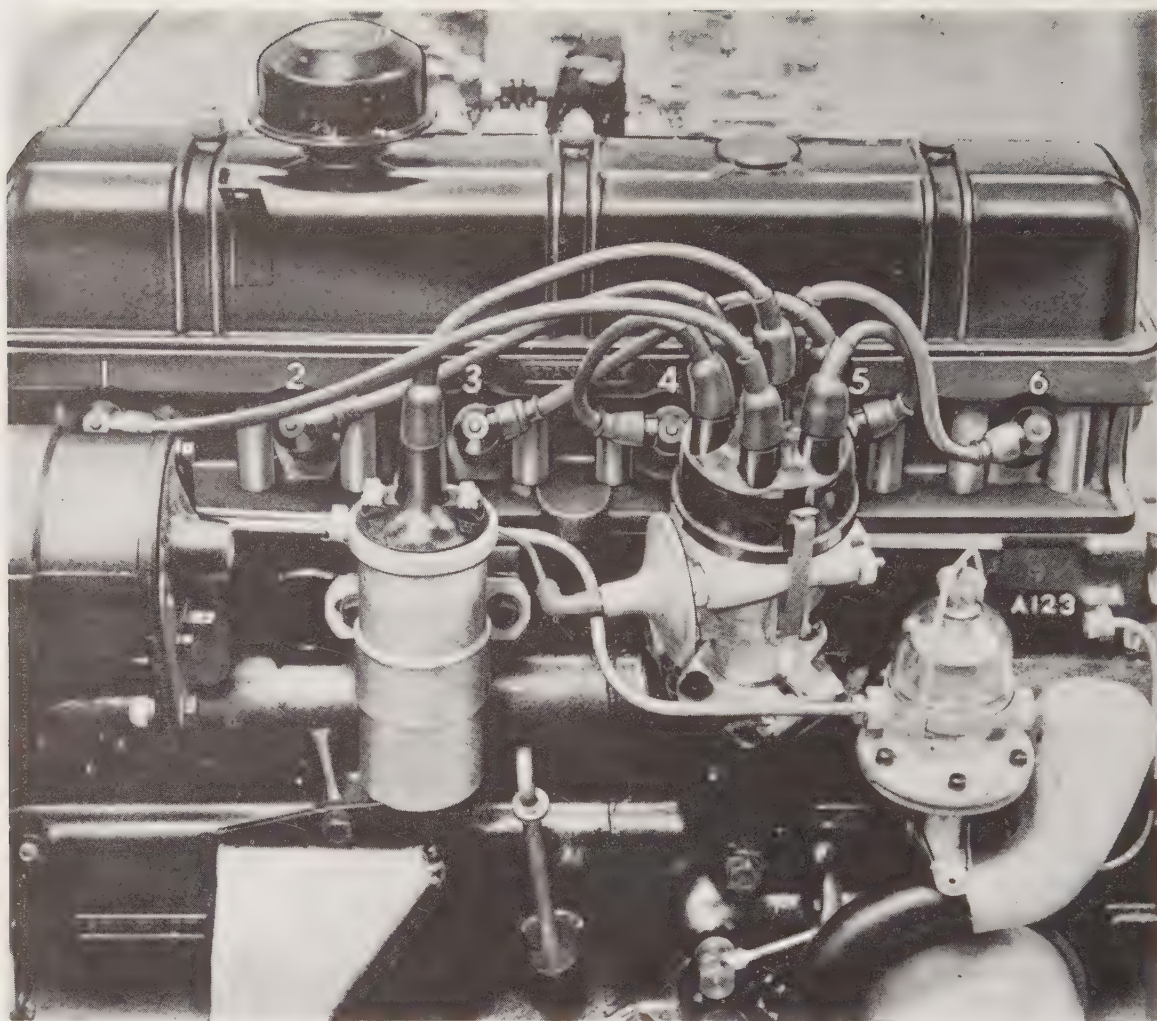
7 Attachment sequence of high-tension cables on 6-cylinder engine.
